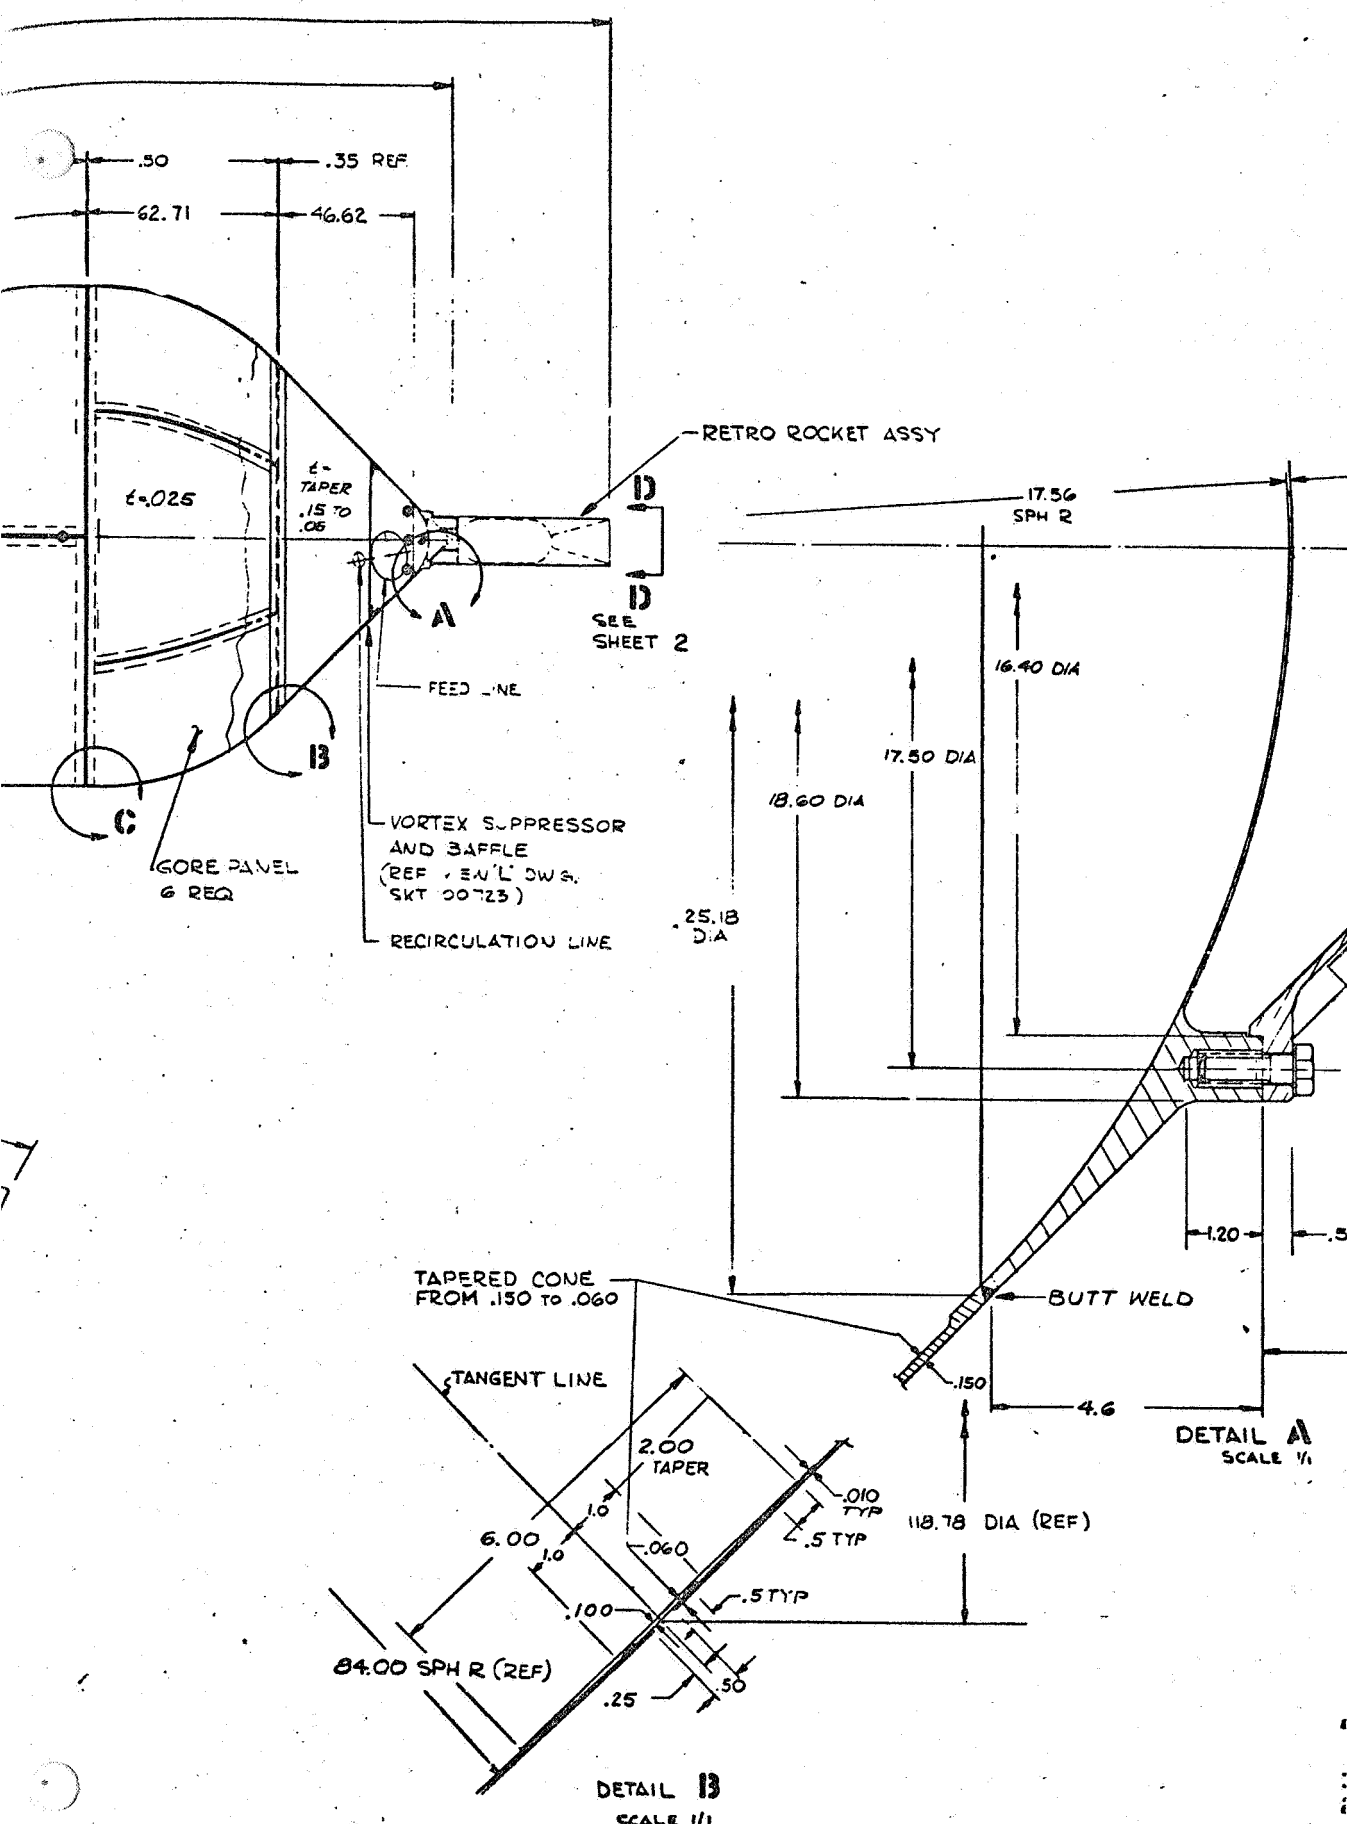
Droptank Assembly and Installation (Sheet 1)
